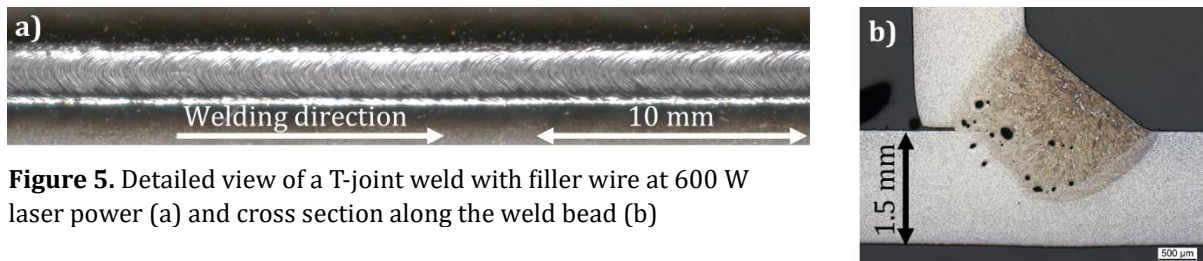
Detailed view of a T-joint weld with filler wire at 600 W laser power (a) and cross section along the weld bead (b)
